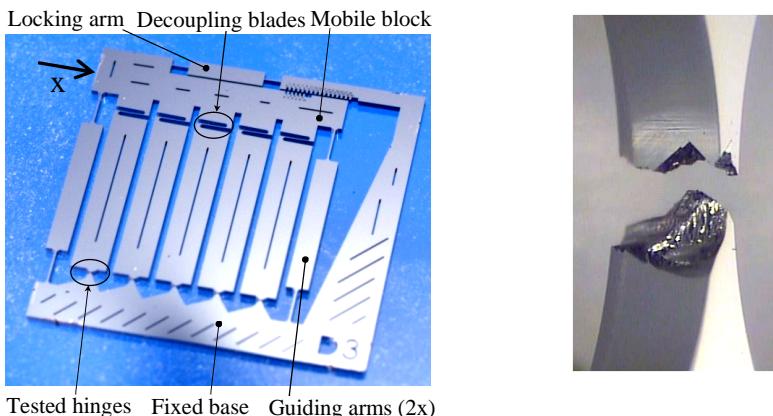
Test-specimen with five identical hinges & photo of a fractured C hinge.
